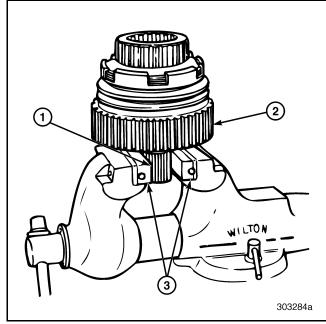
Position Assembly in Soft Jaw Vise (T313L/T318L Shown)
